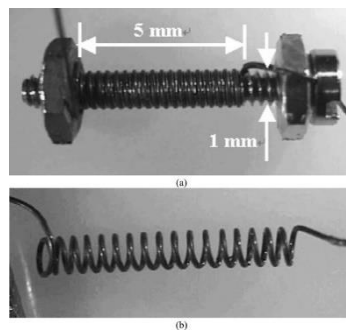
Fabrication of an SMA spring. Constrained SMA wire on a mandrel (above). SMA spring after "shape setting" heat treatment (below) (Kim et al., 2005).
